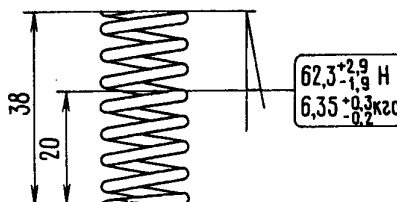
Basic Data for Checking Reducing Valve Spring
